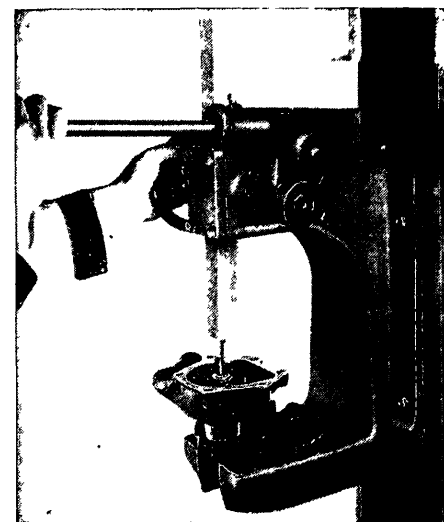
A Pressing water pump shaft and bearing from body. 1937-52
